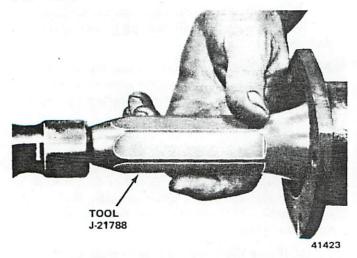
F-22 Inner Oil Seal Installation-CJ and Scrambler Models
